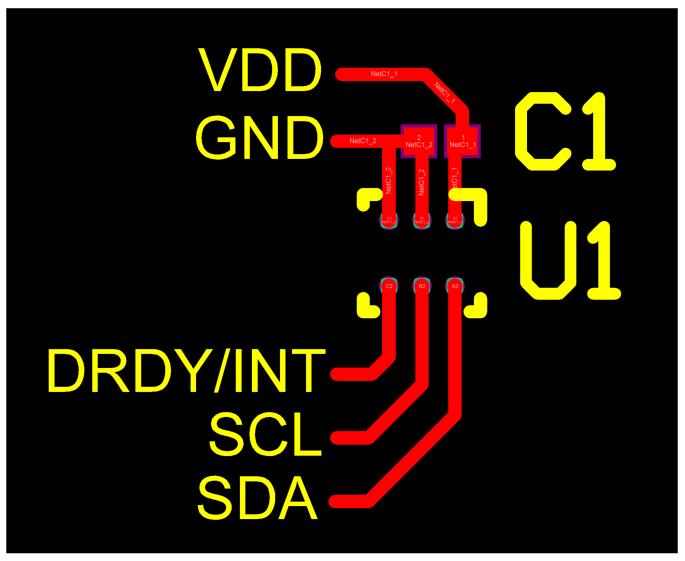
PCB Layout Example HDC1010, HDC2010 [DSBGA Package]
